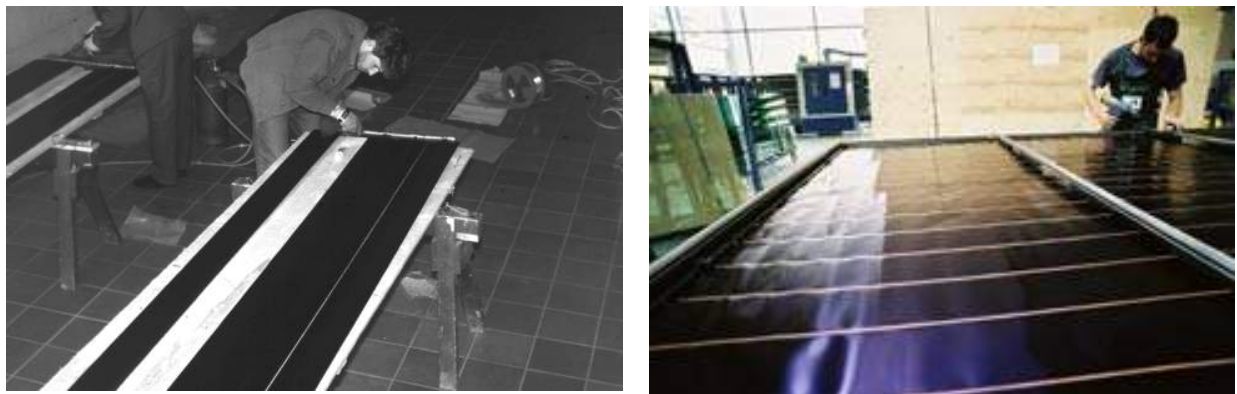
Solder up of the absorber strip with the header pipe (left) and large-scale absorber consisting of one big copper sheet (right)
